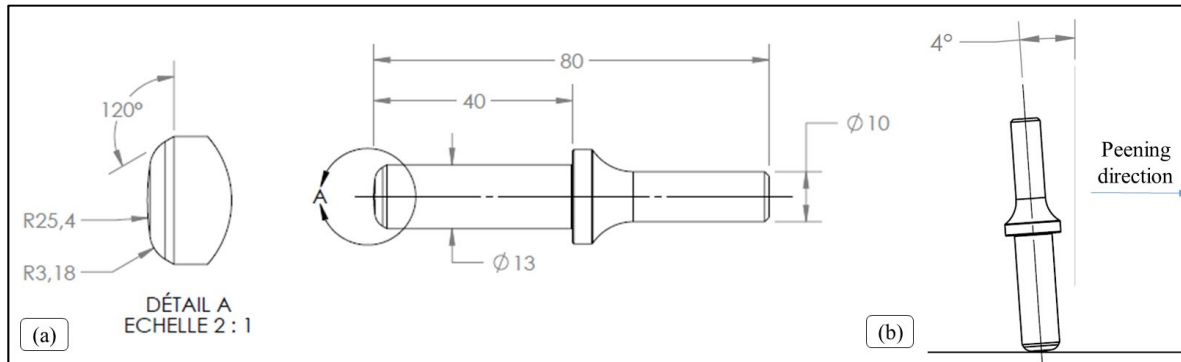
(a) Hammer peening head geometry (dimensions in mm) and (b) the rearward tilt angle
